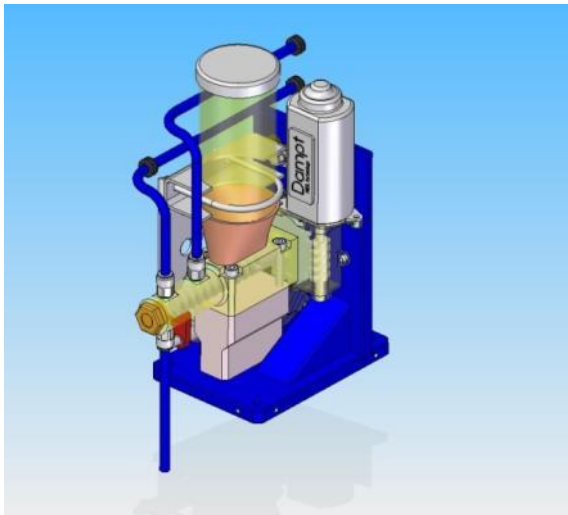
Close-up of 12 volt motor and lead-screw mechanism
